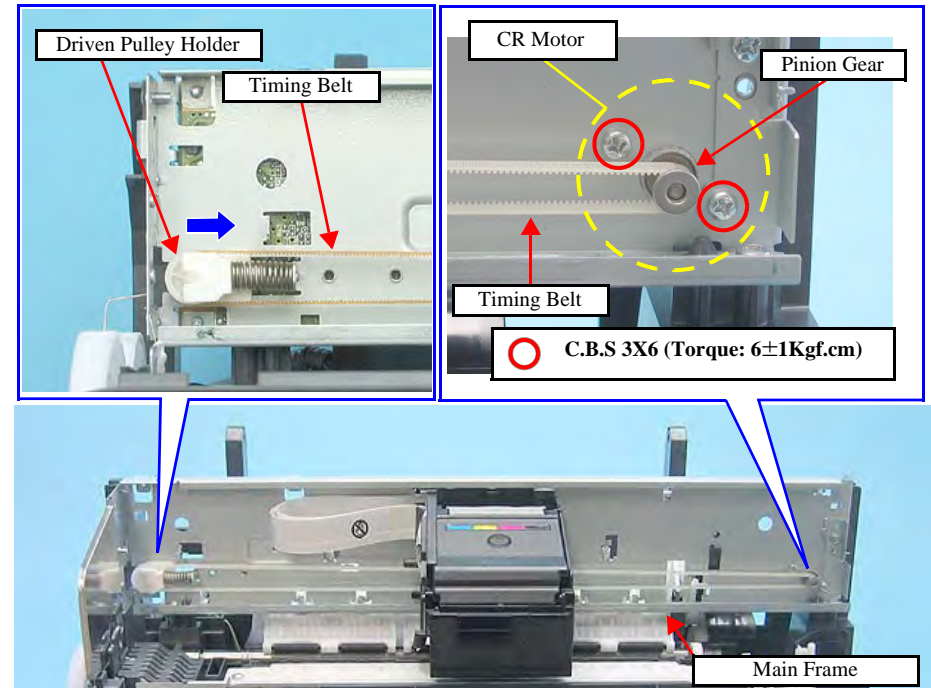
Releasing Timing Belt and Removing CR Motor
